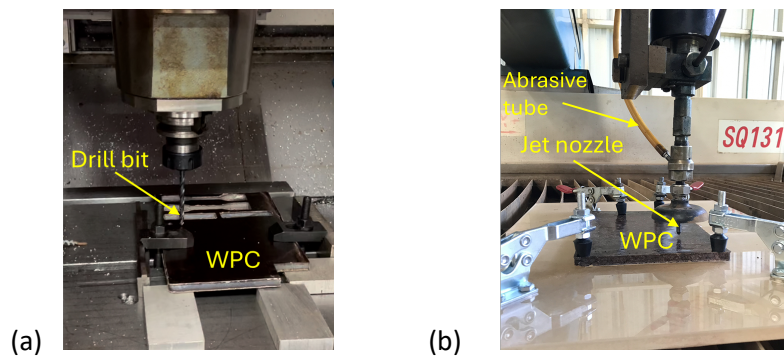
Experimental setup of (a) hole drilling and (b) hole cutting using AWJ
